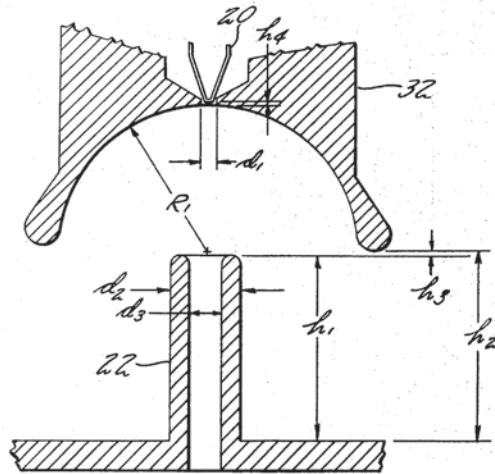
A 150 kV, 6 kW EB Welding gun with Rogowski electrode profile (Ref: Google patent US3835327A [6]).
